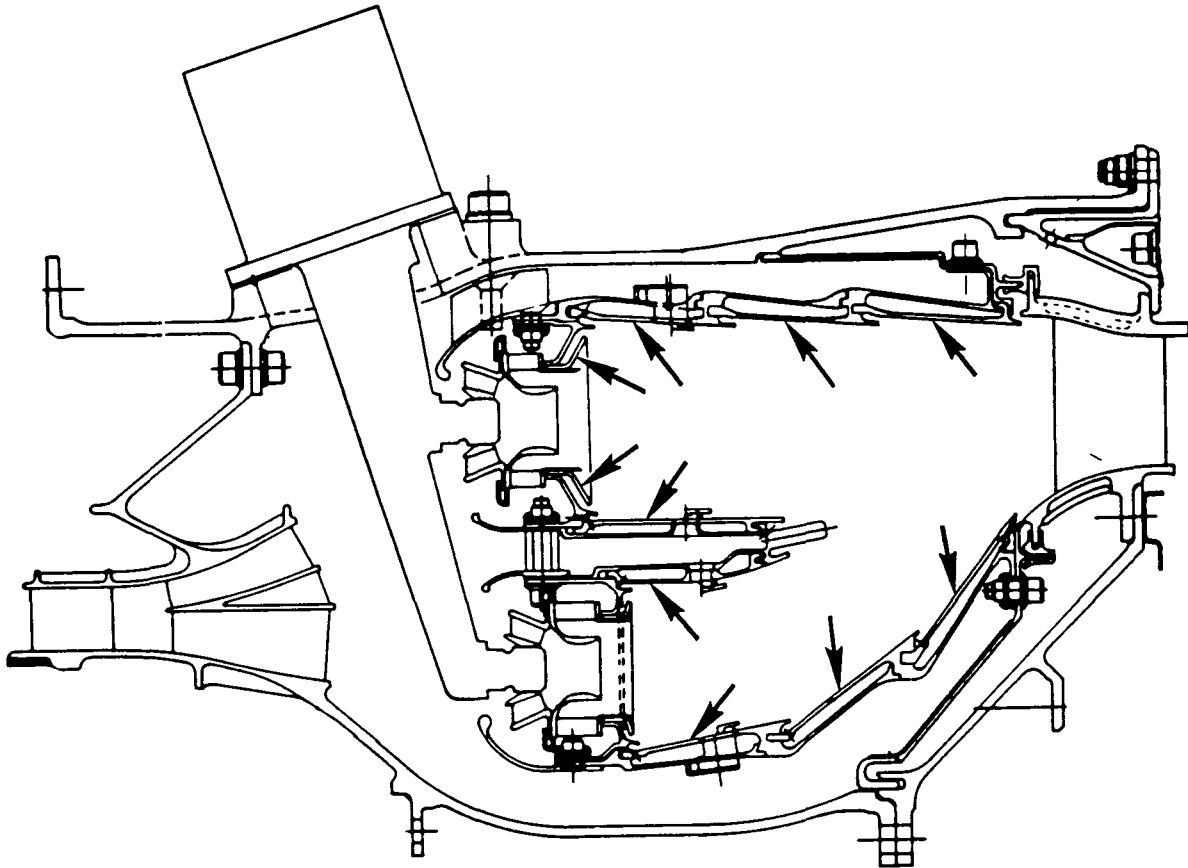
Thermal-Barrier Coated Surfaces in Combustor.
